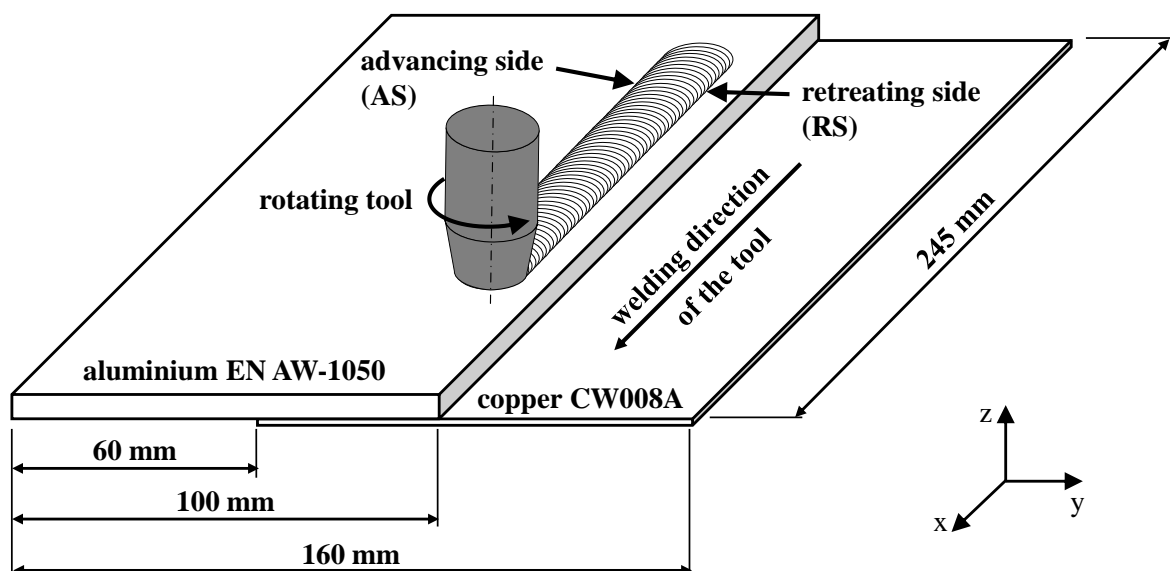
Schematic diagram of the sample dimensions and of the lap welded aluminium / copper joints.
